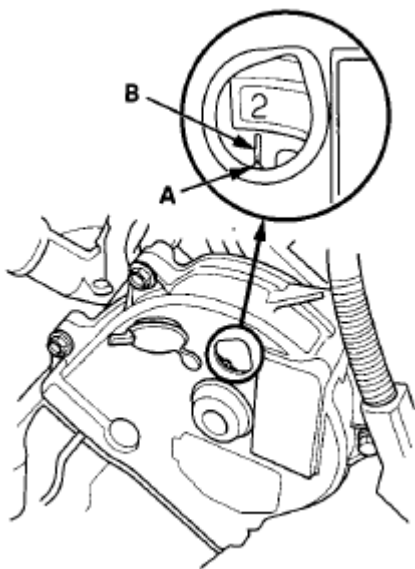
Identifying Pointer And TDC Mark On Piston No. 2
